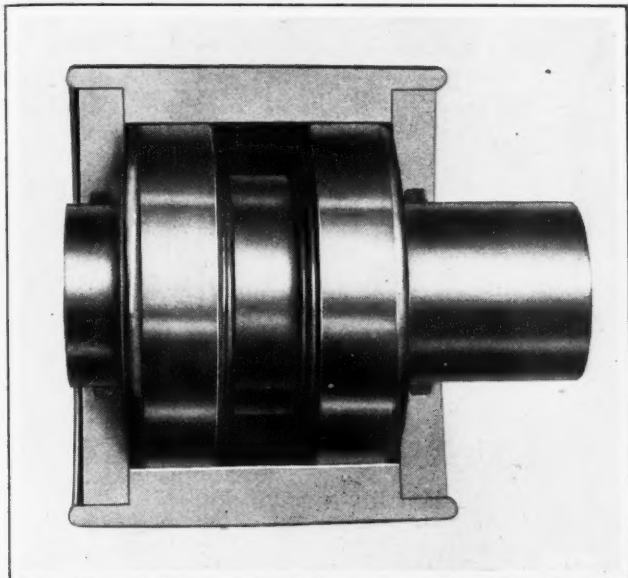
St. Louis Loose Pulley equipped with Taper Roller Bearings
